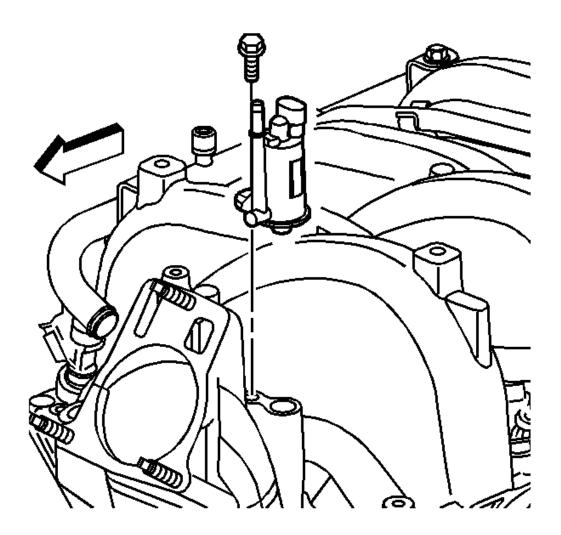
View Of EVAP Purge Valve Courtesy of GENERAL MOTORS CORP.
